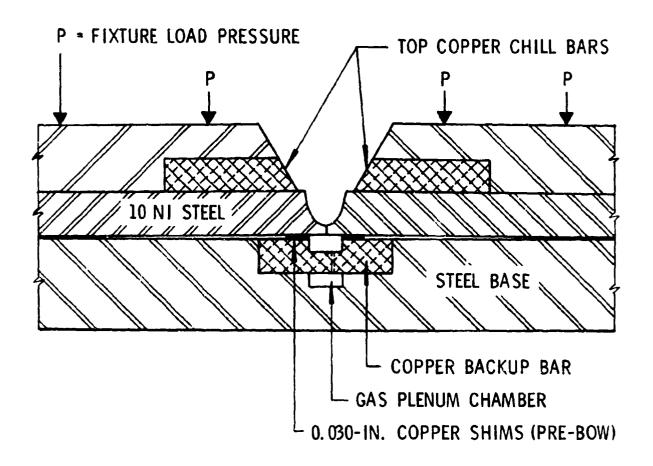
SECTION OF GTA WELD FIXTURE
